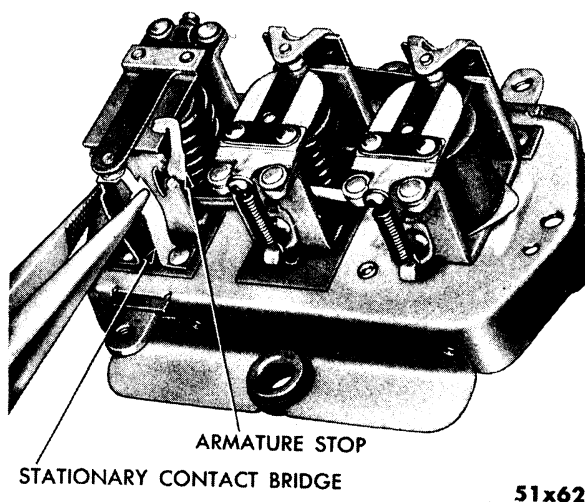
Adjusting Cut-Out Relay Contact Clearance
